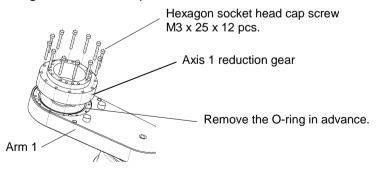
Dismounting axis 1 reduction gear (KHL-300, KHL-400)
